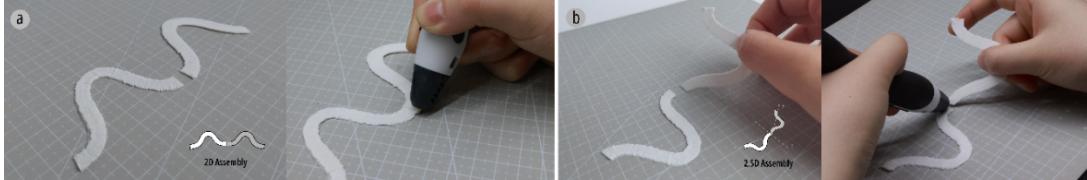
Schematic diagram of (a) 2D and (b) 2.5D front and back assembly of two unit components.
